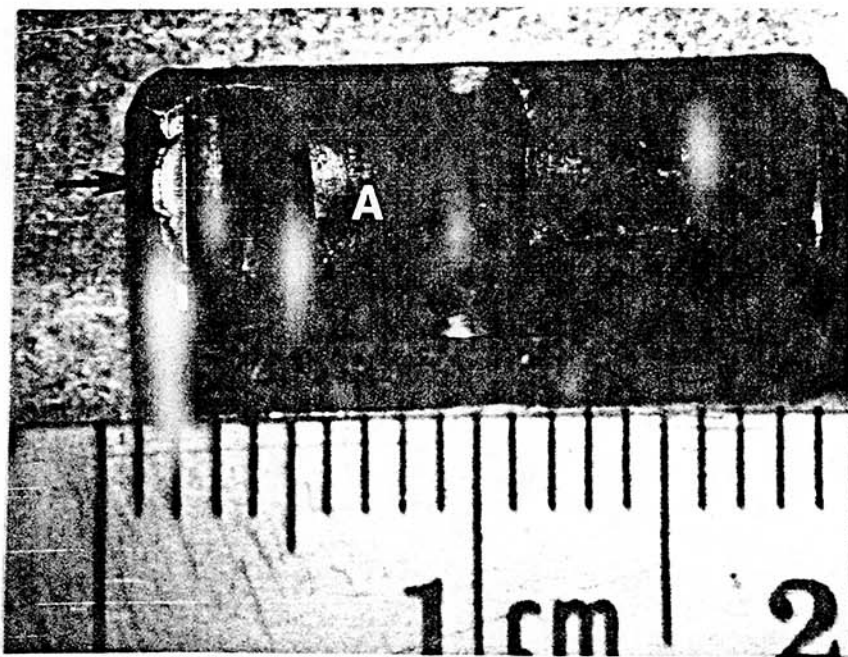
Top view of extractor A showing fractured lip (arrow).
